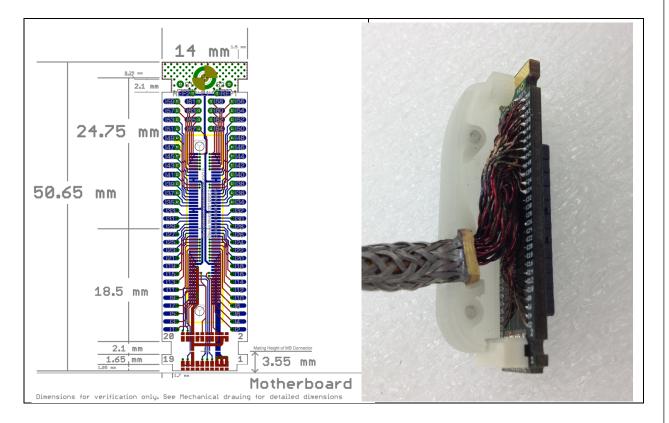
Opto-box connector board PCB layout and a connector assembly with shell. Notice the ferrule and nut soldered to the cable braid at the connector neck provide the strain-relief (a la
